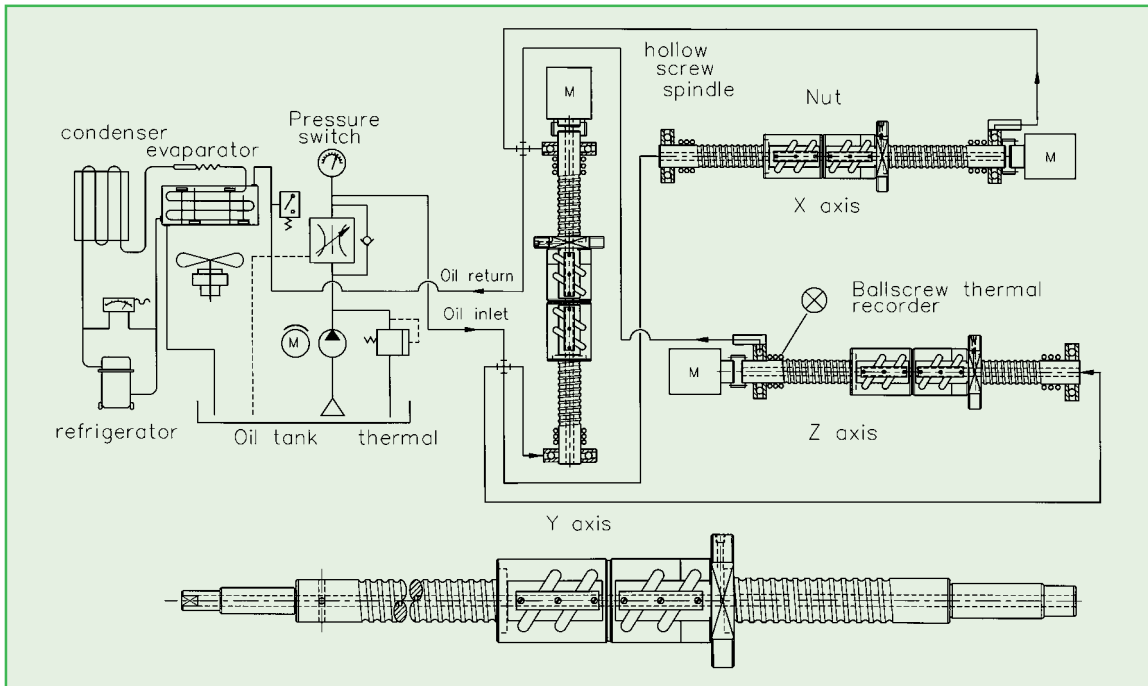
High accuracy machine tools with hollow ballscrew lubrication.
